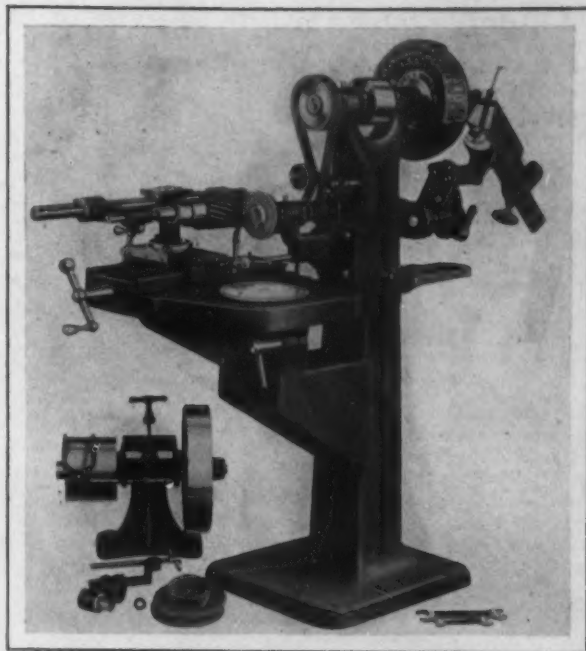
The BX New Yankee Combination Cutter, Reamer and Drill Grinding Machine Built by the Wilmarth & Morman Company.
